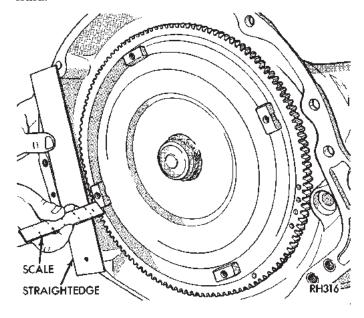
Checking Torque Converter Seating EXTENSION HOUSING
